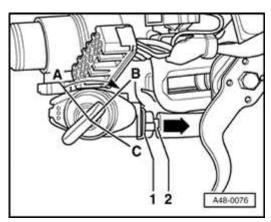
Raising Locking Bracket Slightly And Removing Locking Cable From Ignition Housing Courtesy of VOLKSWAGEN UNITED STATES, INC.
